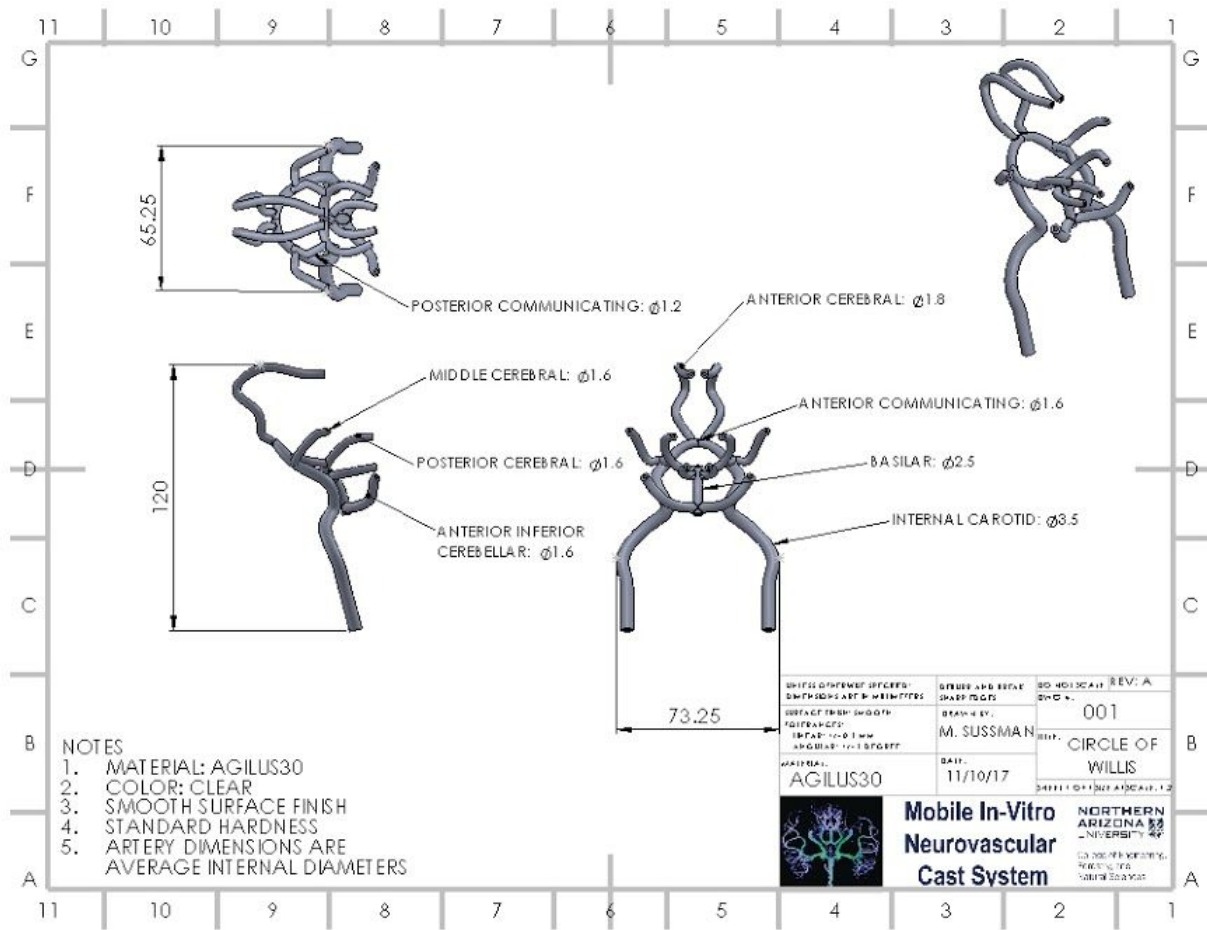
Solidworks drawing showing different views and overall dimensions of Circle of Willis model
